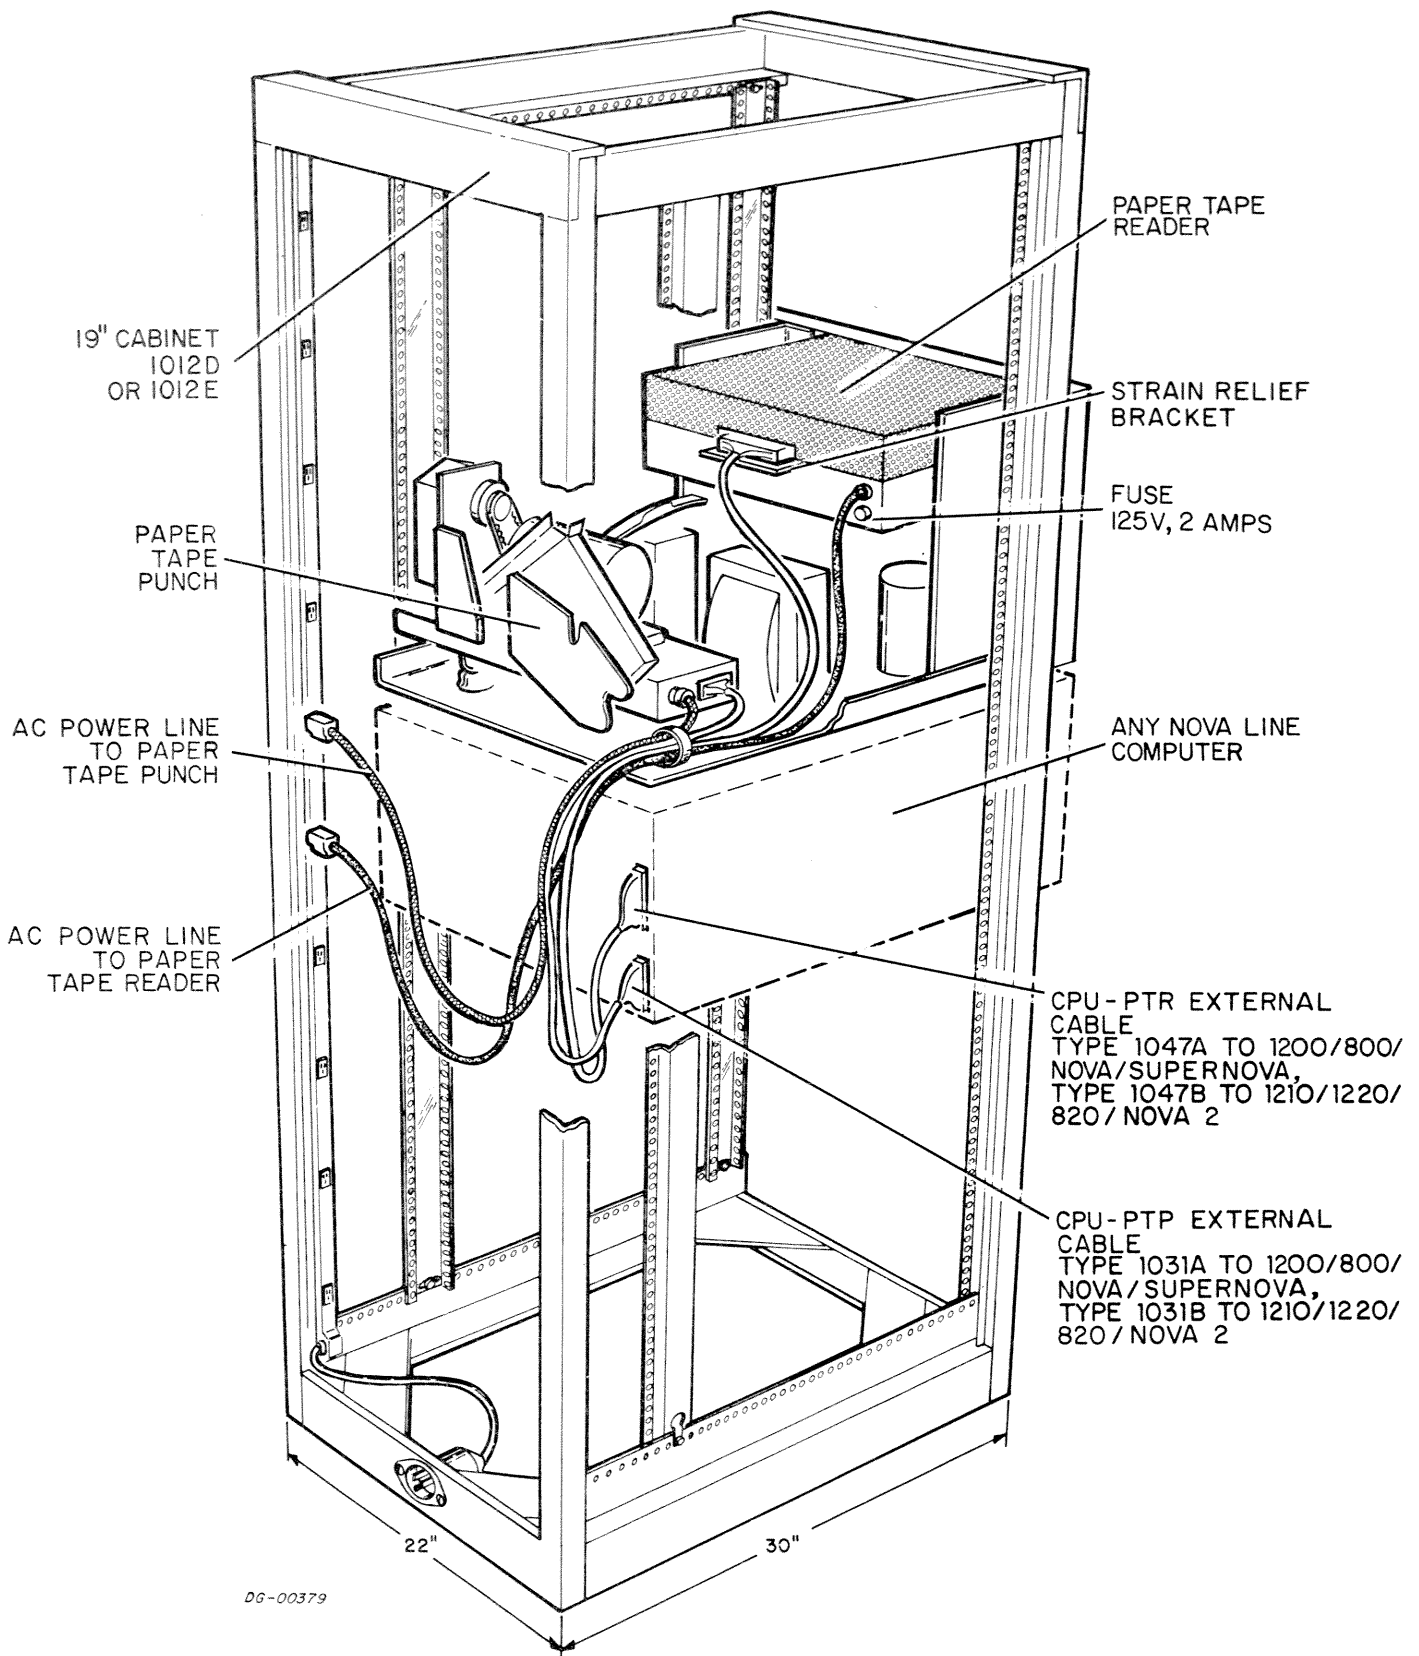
Cabling the Paper Tape Reader and the Paper Tape Punch
